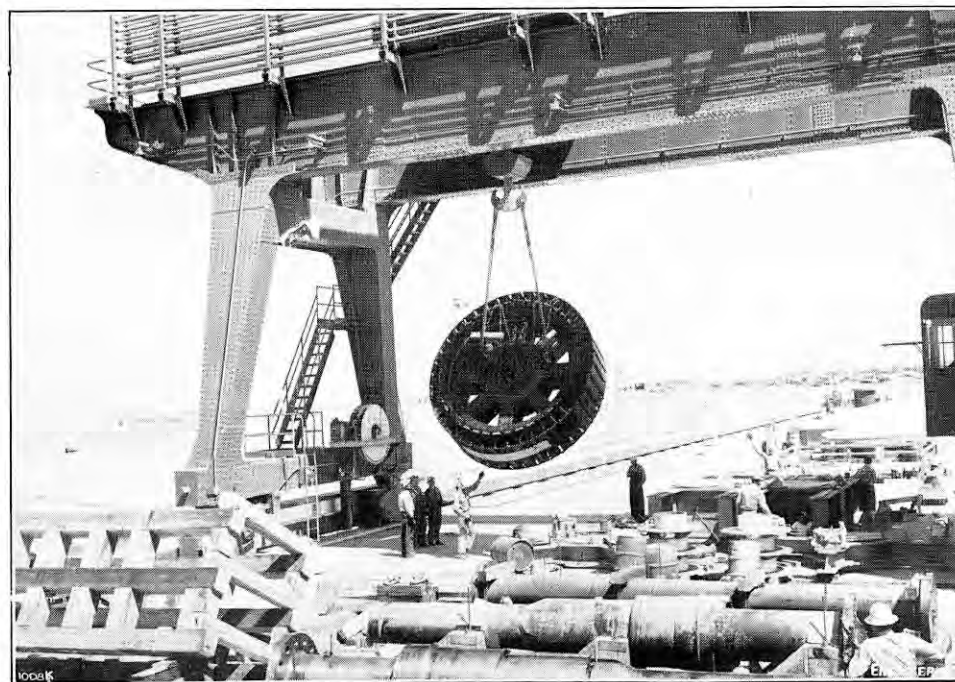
GANTRY CRANE HANDLING MOTOR ROTOR.
